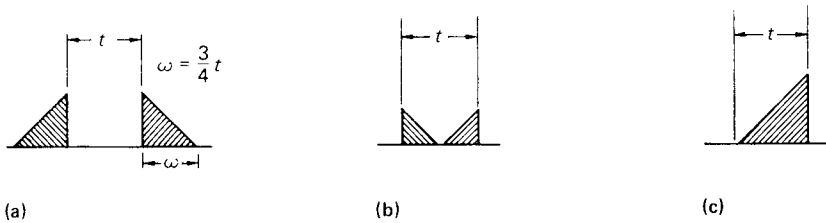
Comparison of fillet and bevel-groove welds. ω is the leg size of the fillet weld in inches = 19.1 mm (¾ in.); A is the cross-sectional area of the weld in square inches = ½ ω²; t is the plate thickness in inches = 25.4 mm (1.0 in.) (a) Fillet welds. (b) Double-bevel groove weld. (c) Single-bevel groove weld.
